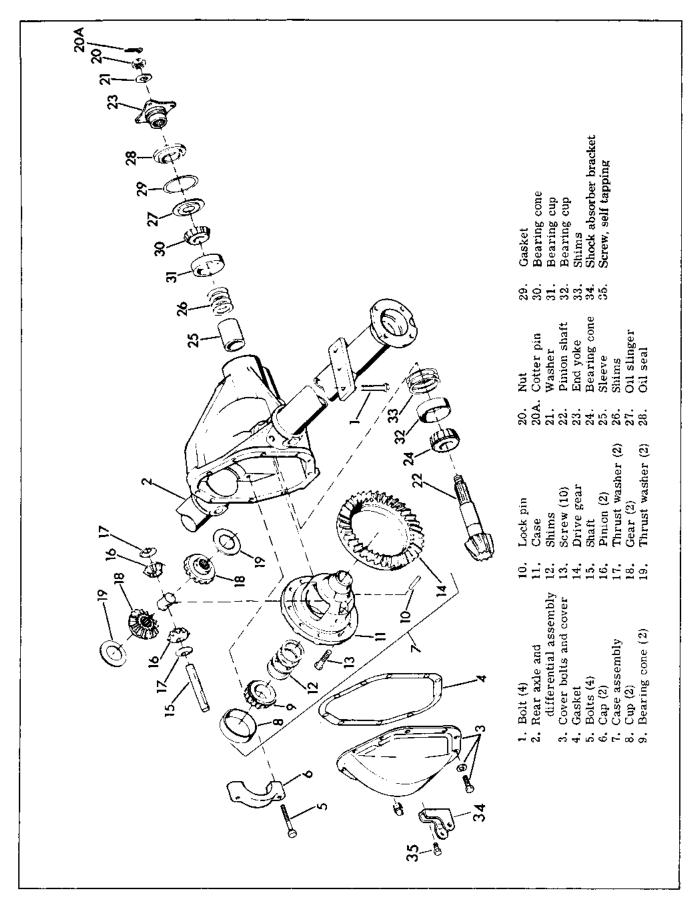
B-14. Differential Assembly (Early 1977 and Earlier and Late 1978 and Later) - Exploded View
